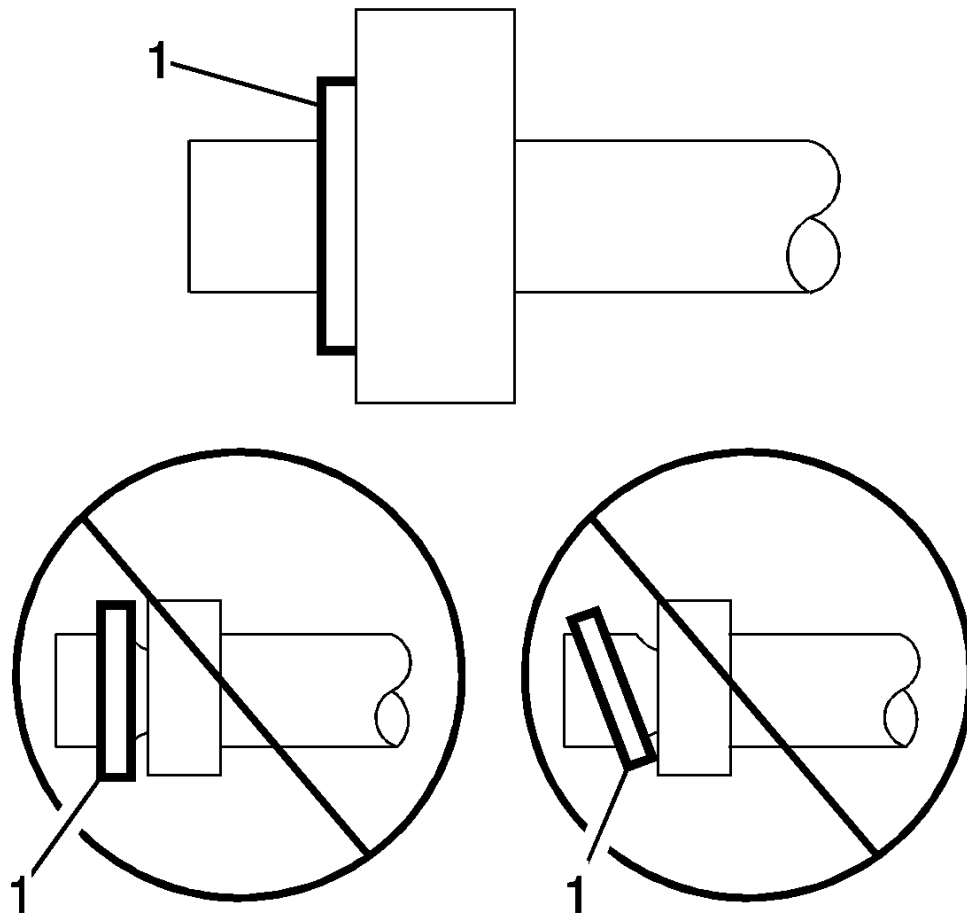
Identifying Proper Seating Of A/C Refrigerant O-Ring
